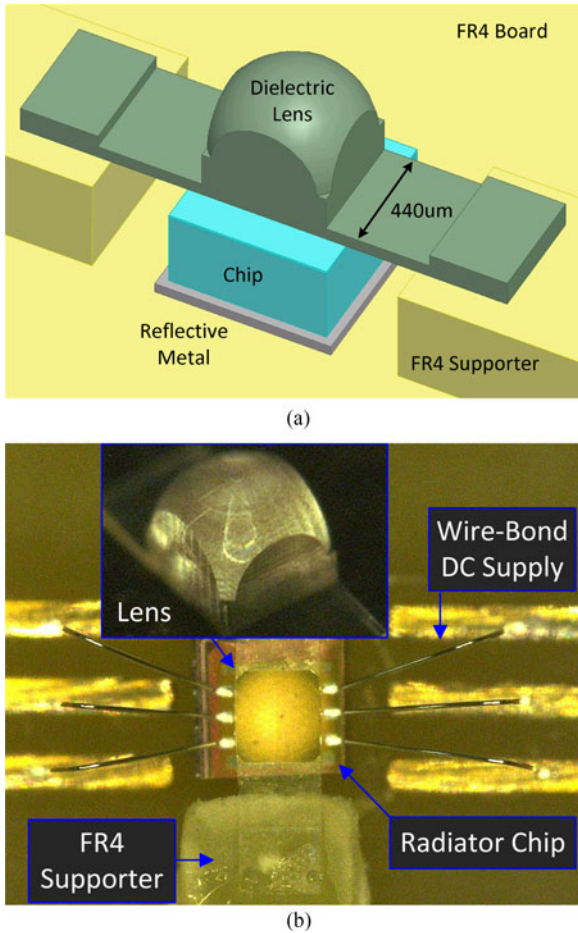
(a) 3-D view of the PCB assembly of the chip along with the dielectric lens, and (b) photograph of the PCB assembly of the chip along with the dielectric lens.
